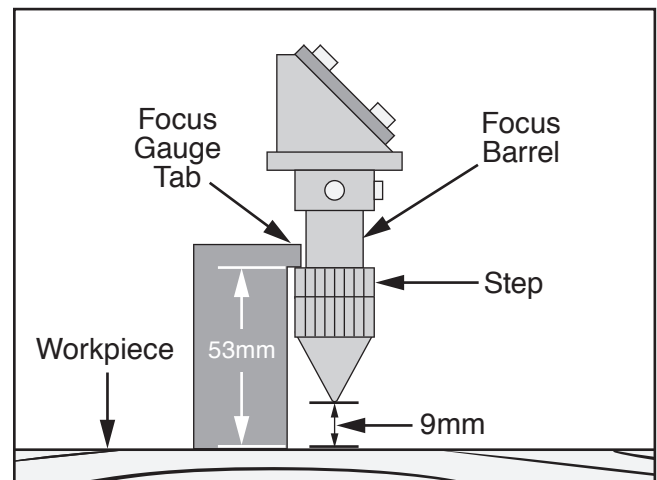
Focus gauge resting on workpiece and upper step of laser head focus barrel.
